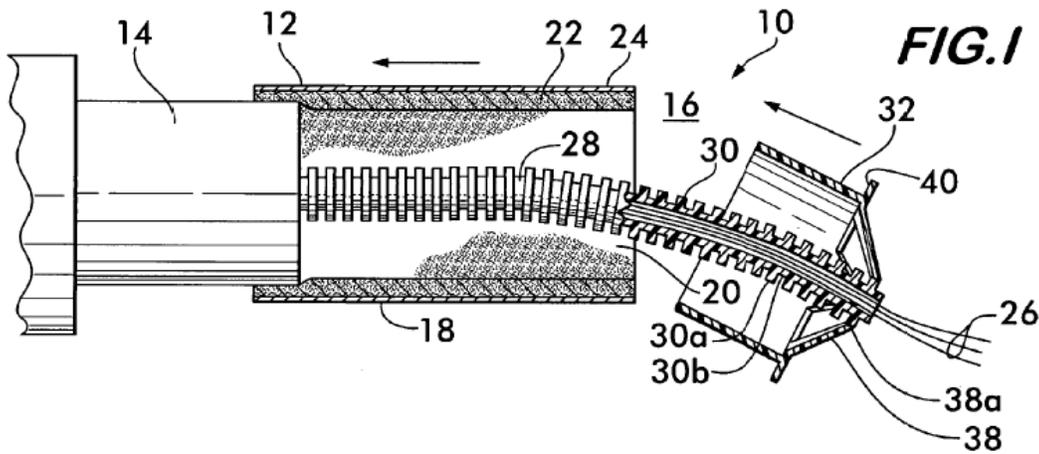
is an exploded sectional view of Fryberger, Jr.'s assembly. See Fryberger, Jr. ¶ 7.
